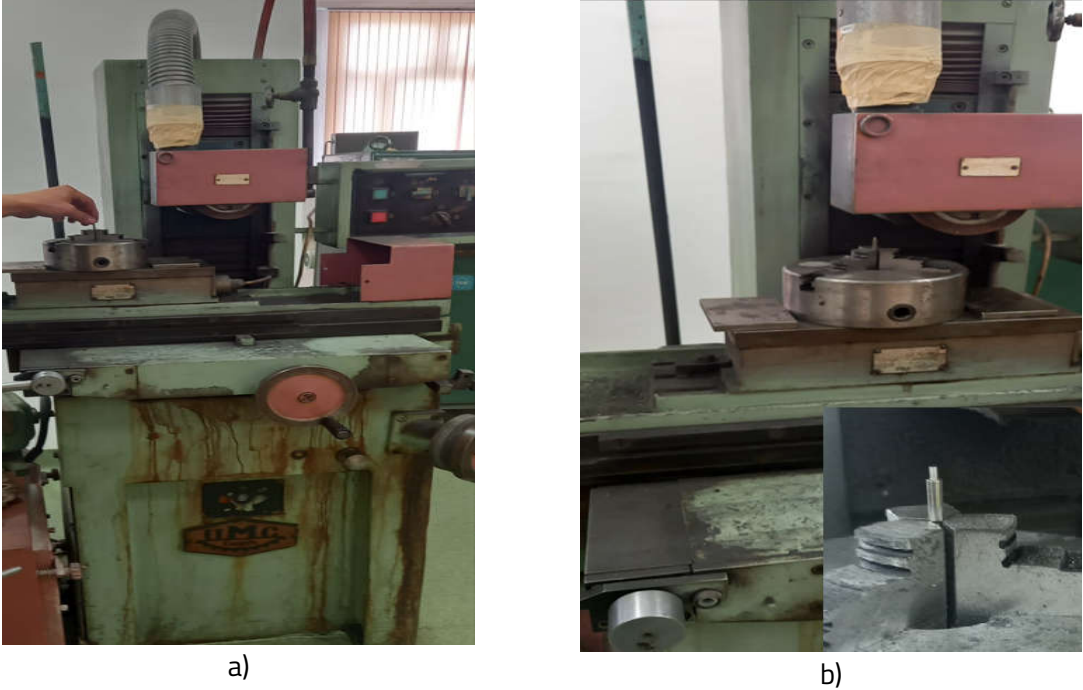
UMG Cugir grinding machine: a) general presentation; b) the detail of the rectification process
